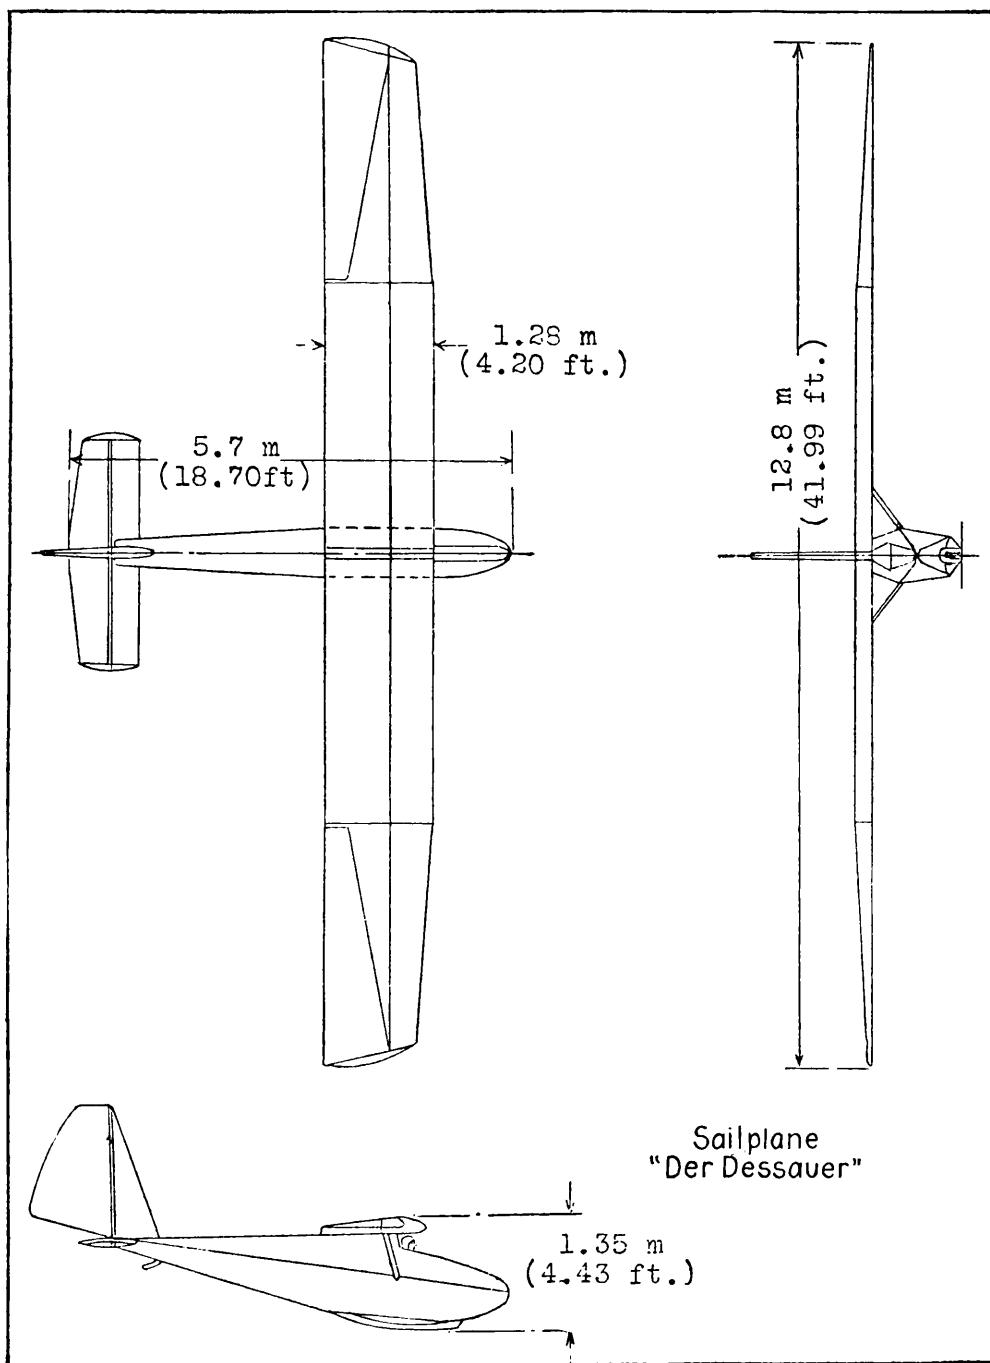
Side, Plan and Front Views of the Sailplane "Der Dessauer."
